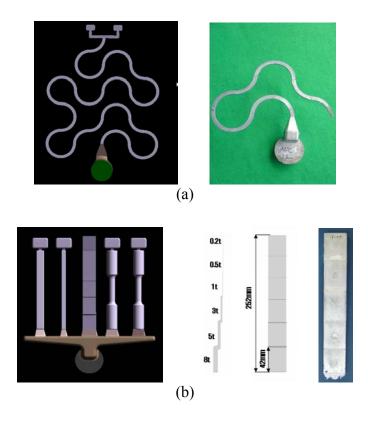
Schematic drawing of fluidity test die for die casting; (a) Serpentine type, (b) Step type
